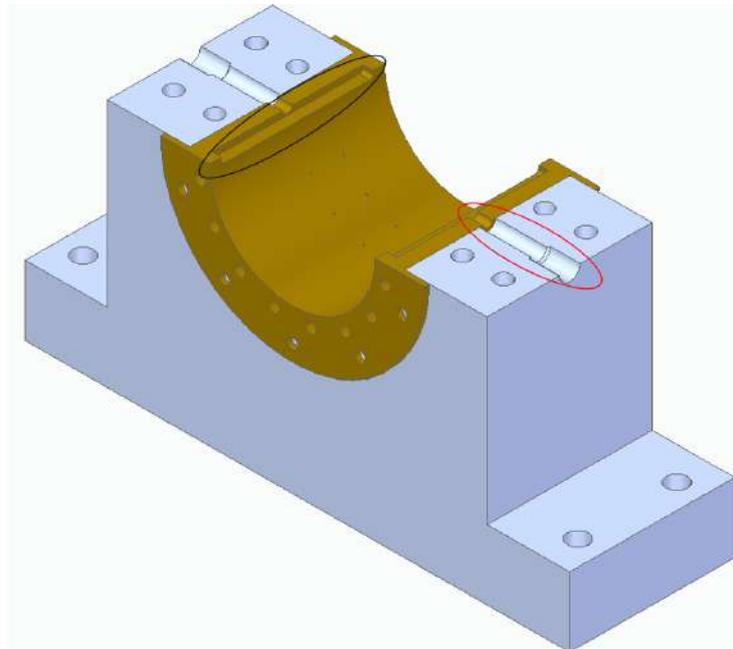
Red circle shows the inlet oil to feed the bearing; black circle points the geometry of the groove region
